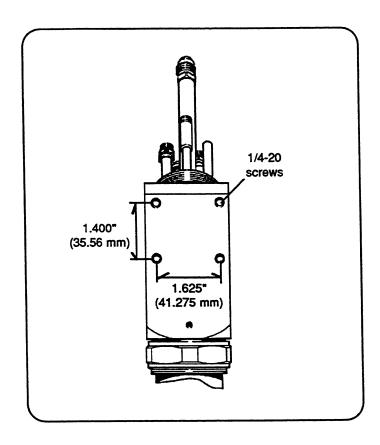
45° Torch Quick Disconnect Mounting Hole Dimensions
